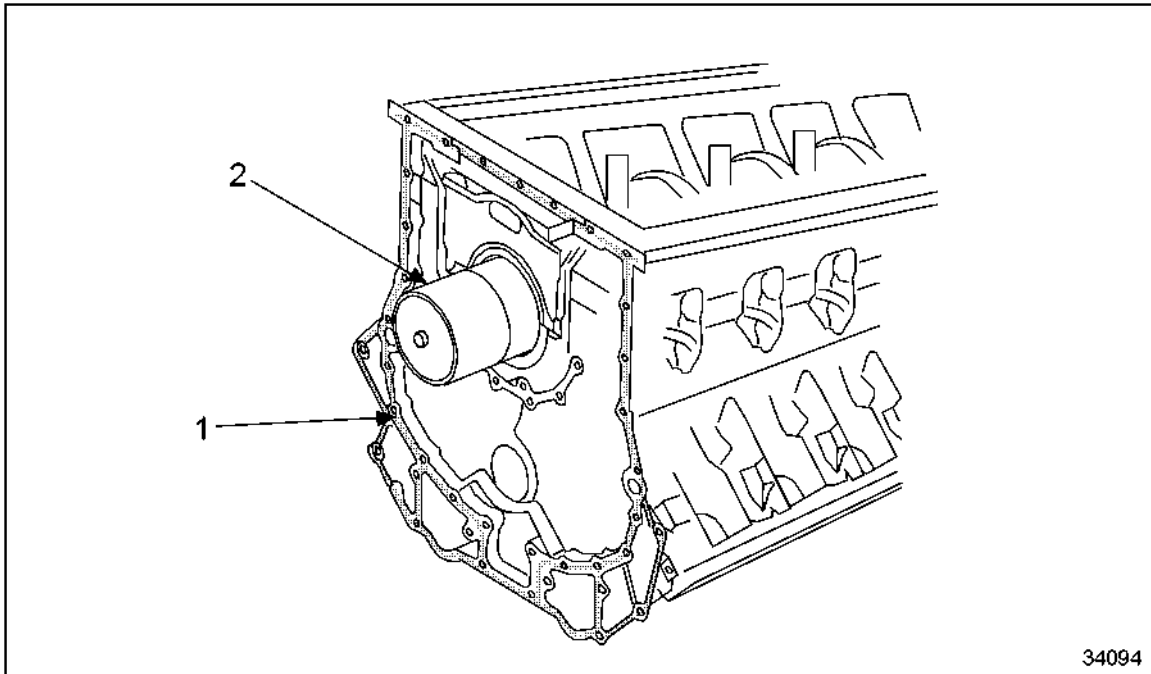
Smoothing Gasket Eliminator on Sealing Surface
